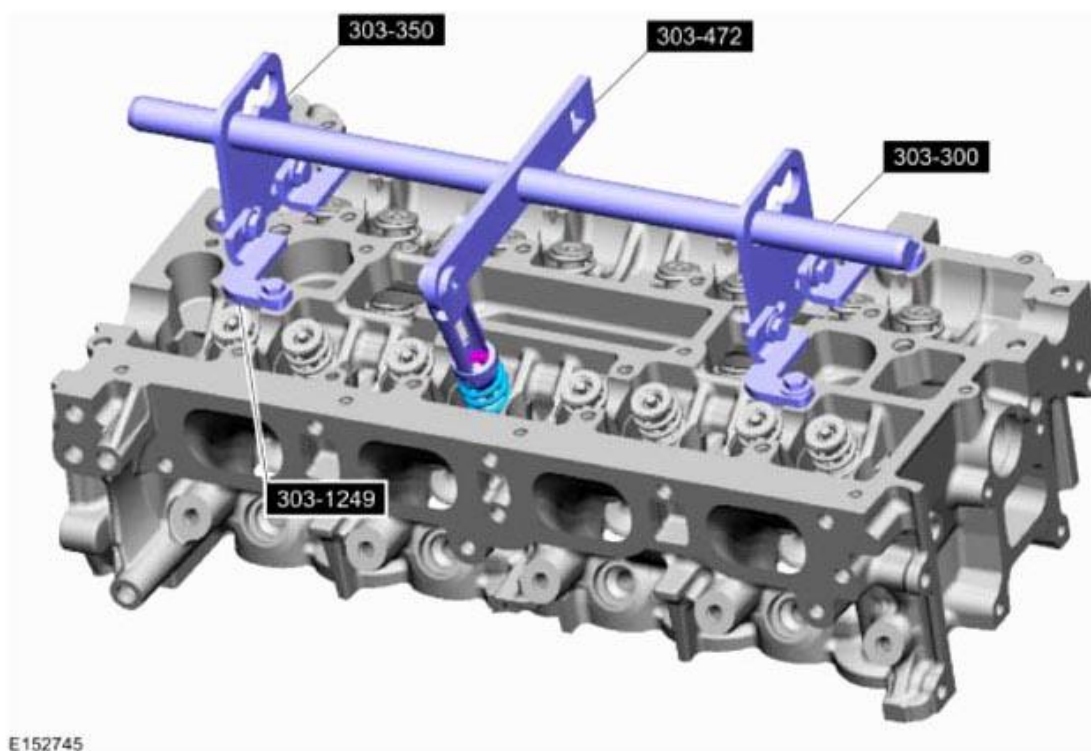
Installing Valve Collet Using Some Multi-Purpose Grease
